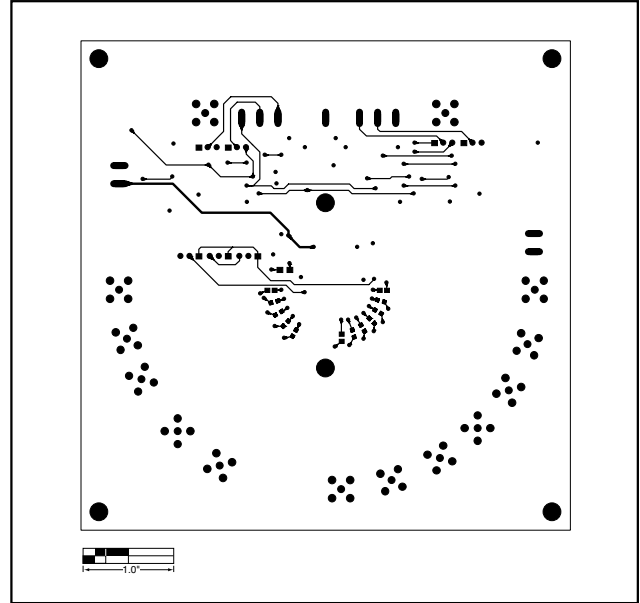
MAX5183 EV Kit PC Board Layout—Solder Side (Layer IV)
